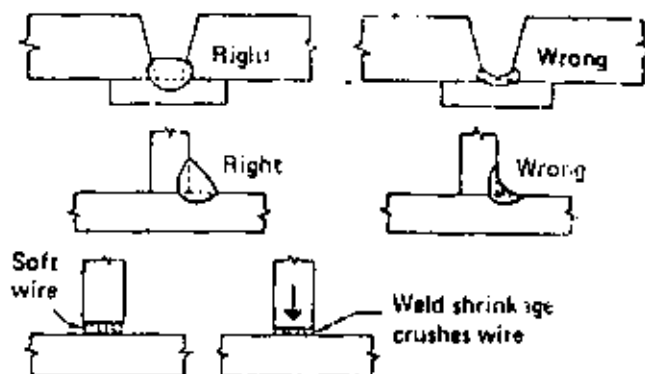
Factors in controlling weld cracking. Illustrated are correct and incorrect joint geometries and bead shapes and a technique to permit stress relaxation in an otherwise rigid joint.
